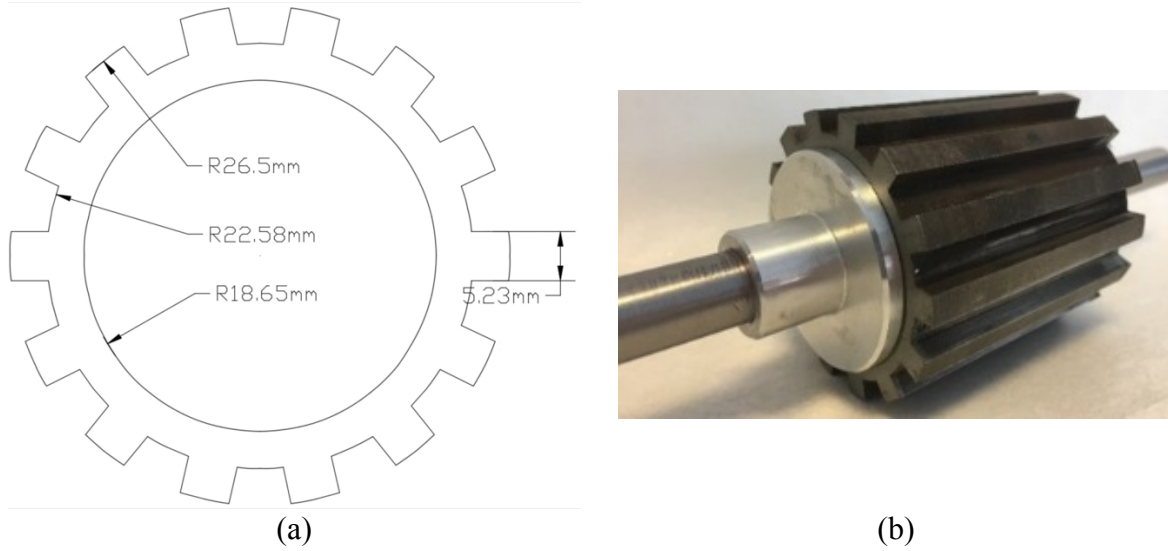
pole rotor of prototype SRMs/DSRMs. (a) Dimensional drawing, (b) 14-pole rotor.
